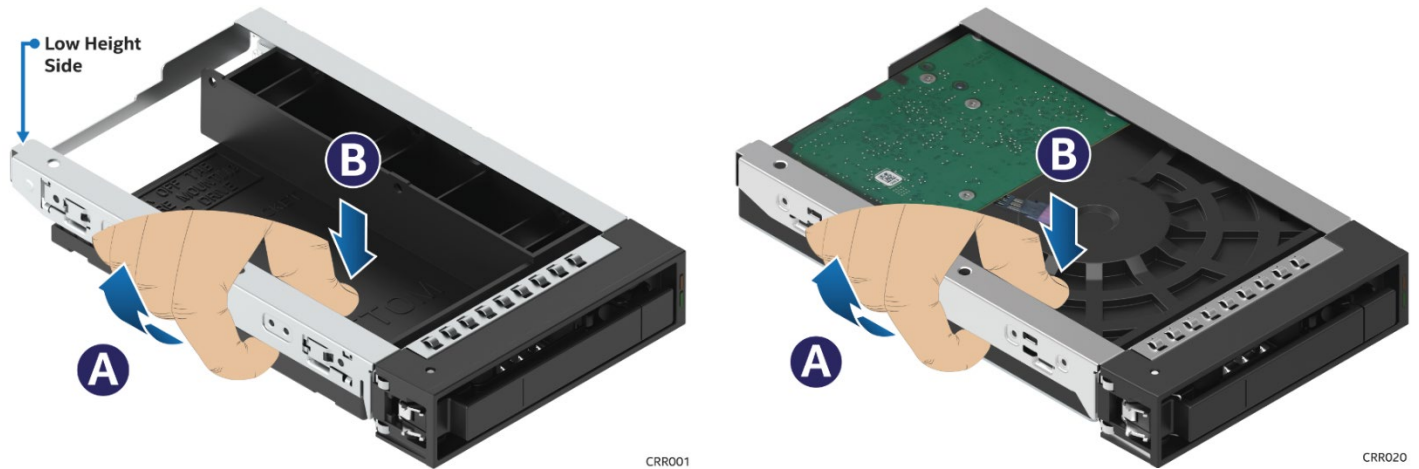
3.5" Drive Carrier Assembly - Drive / Drive Blank Removal
